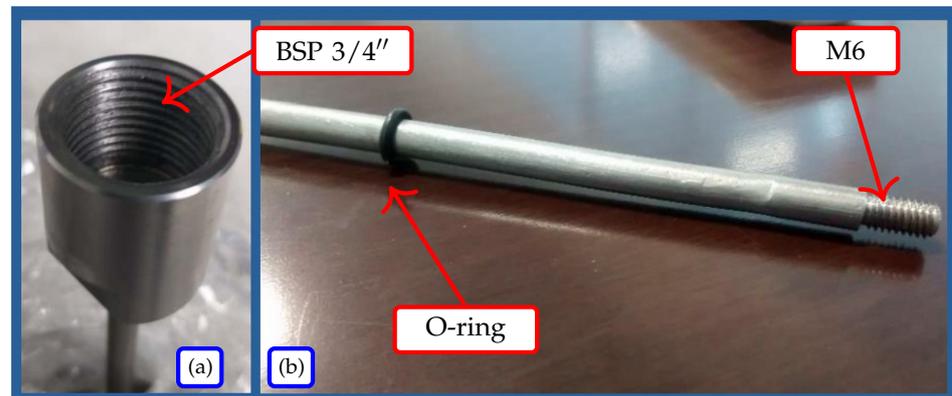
Adaptation tube for in-cylinder pressure measurement—(a) zoom on the BSP 3/4'' thread (where the Thompson valve is inserted)—(b) tube with male M6 thread (which is inserted at the combustion chamber).
